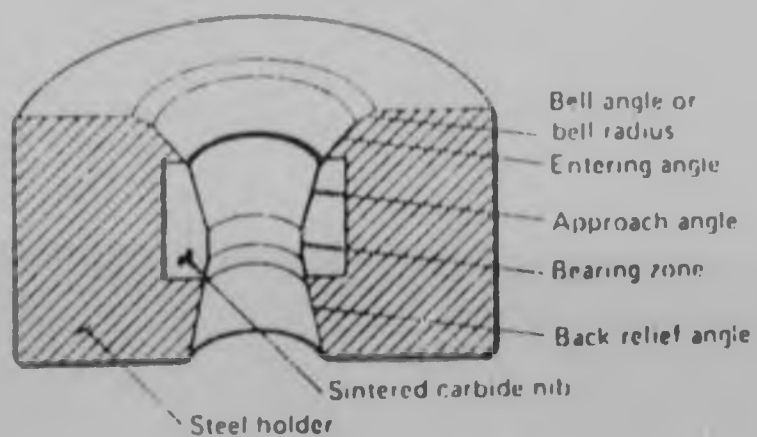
Schematic cross section (not to scale) of a single-hole die employing a nib of sintered carbide mounted in a circular steel holder.
